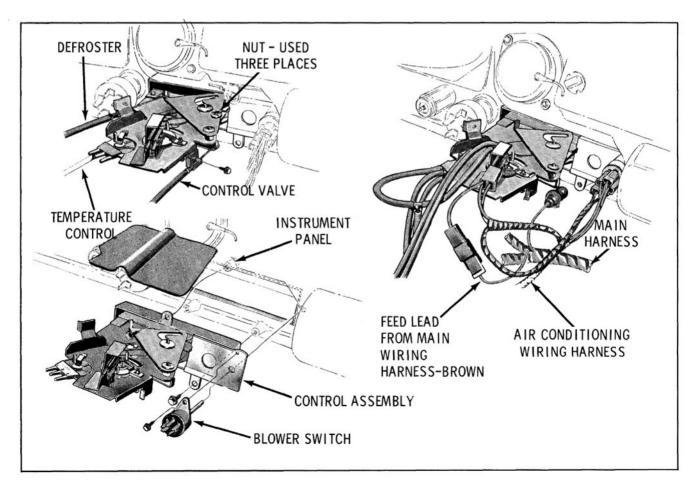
A. C. Control Attachment (30 - 31 & 32 Series)
